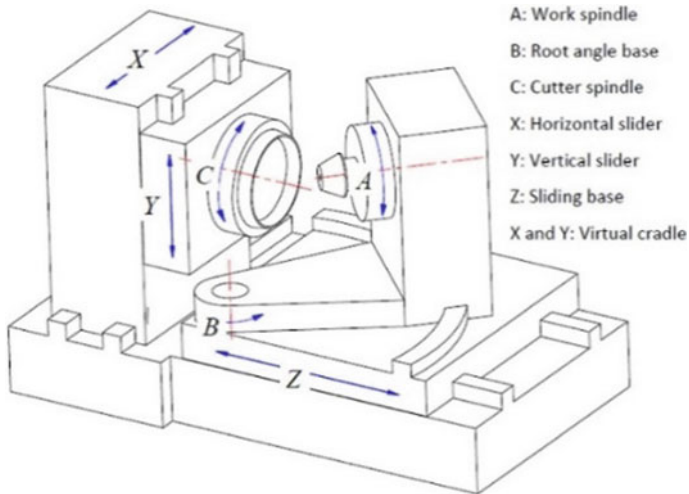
Six-axis CNC bevel gear cutting machine [14]
